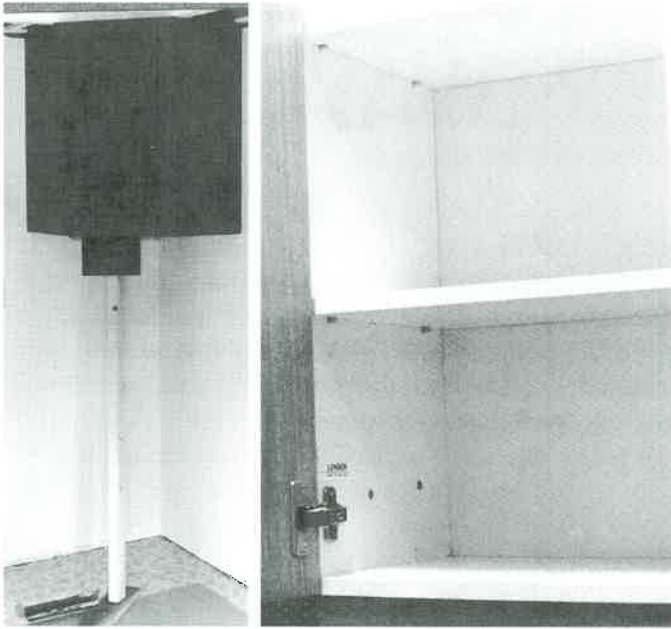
Installing cabinets is a postprocessing task you might do yourself.
